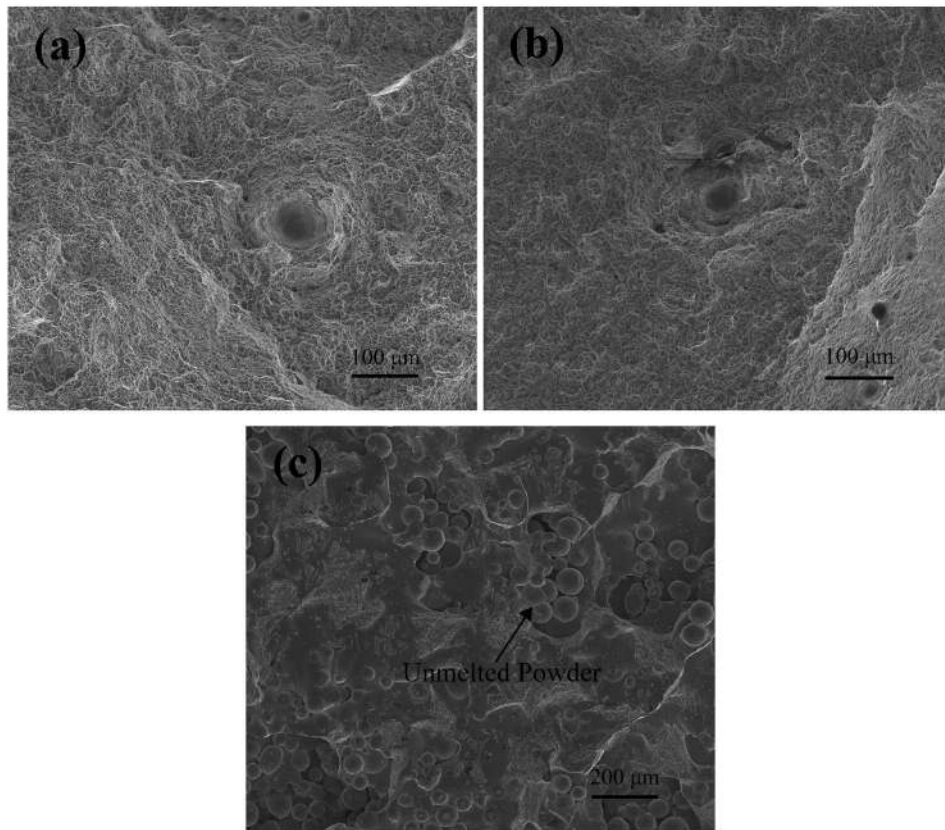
Tensile fracture surfaces of EBM samples: (a) EBM-OP1, (b) EBM-MP2, (c) EBM-MP3.
